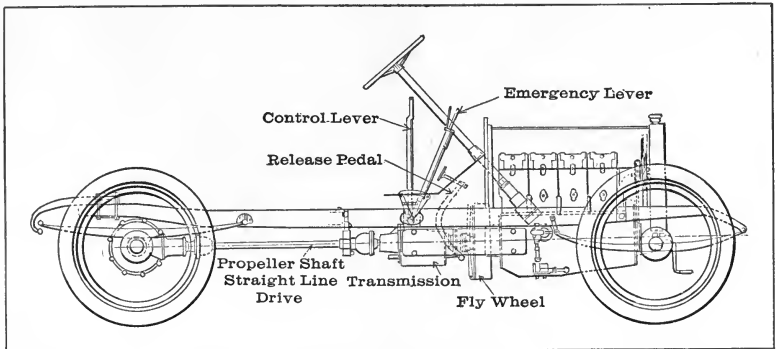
Chassis of Knox Car, in which Straight-Line Driving Shaft is Utilized, which Permits Power Transmission with but Minimum Loss.
